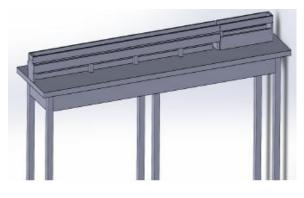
Table Top Complete Tracks and Rest Table Assembly
